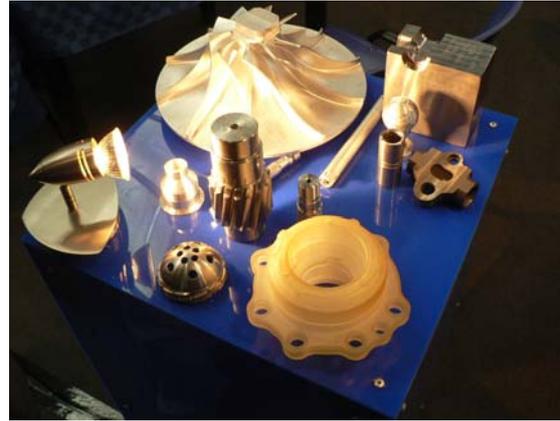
Different types of pieces with complex geometry executed on machine tools and machining centers
